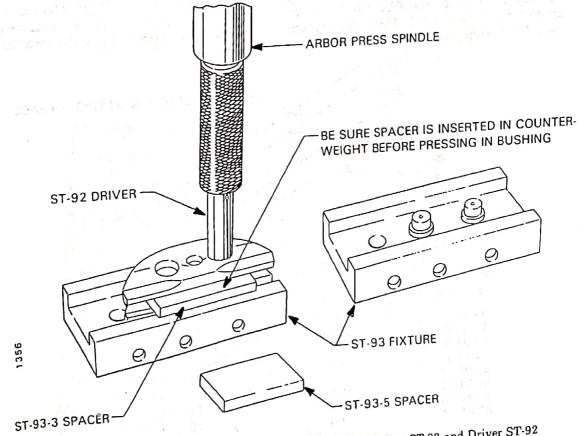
Installing Counterweight Bushing Using Fixture ST-93 and Driver ST-92
